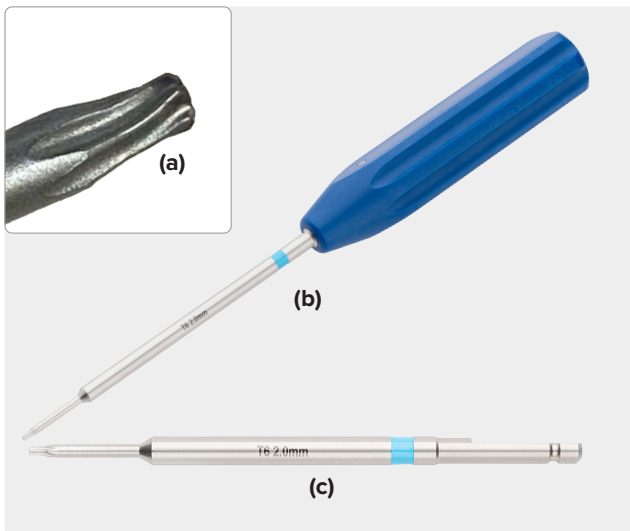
Deformed driver tip (a), T6 screwdriver (b) and T6 driver (c)
